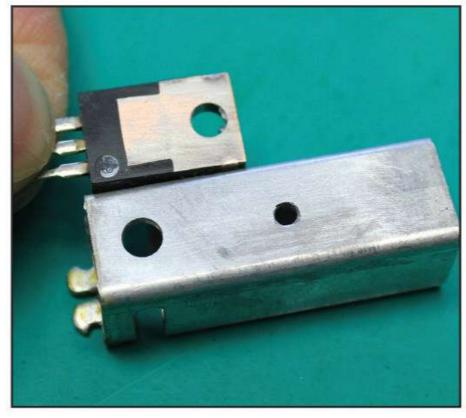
Photo C. Newly-restored transistor and heat sink after scraping both surfaces and sanding to 320 grit.
